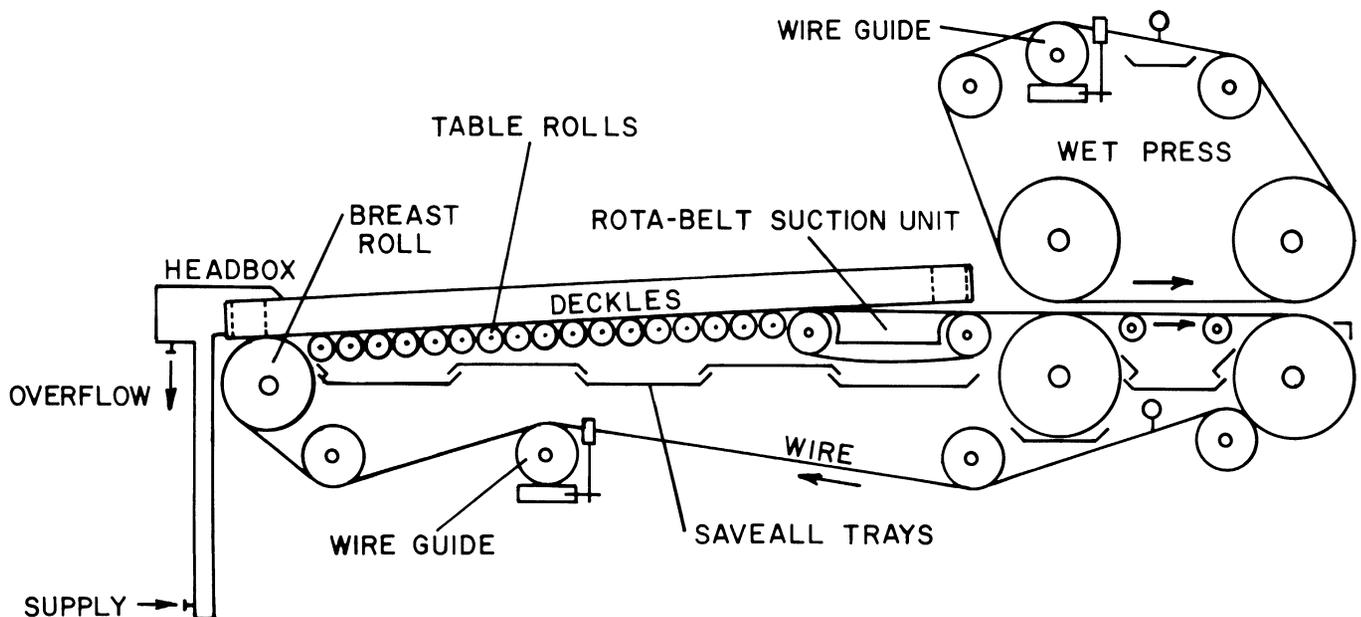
Fourdrinier board forming machine with wet press (Lyall 1969). This is the most common former in wet-process fiberboard industry.
